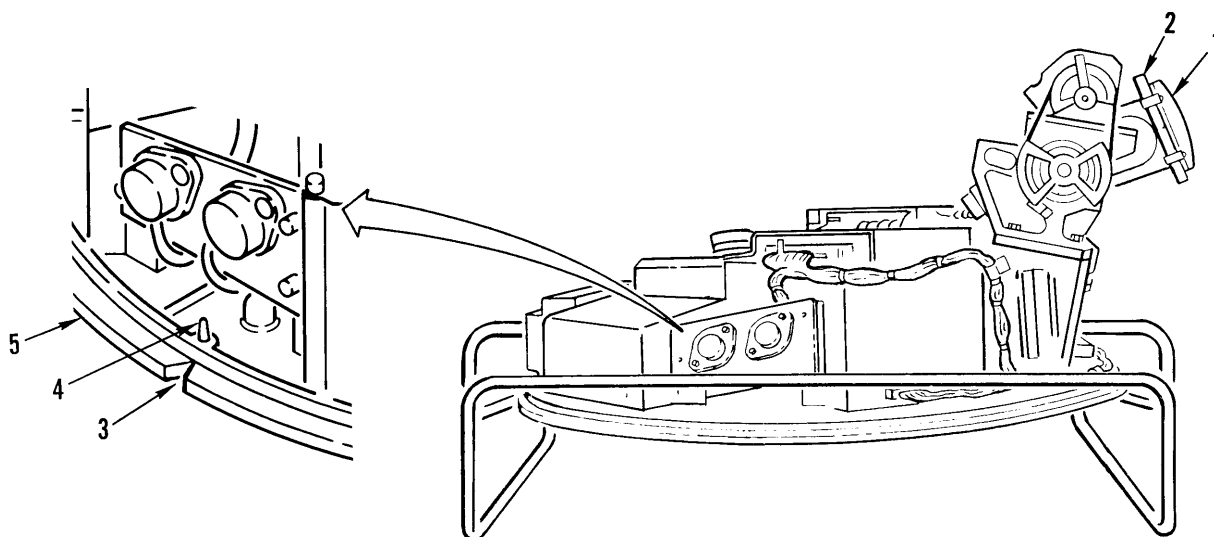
Mounting PNVS NSA on PNVS Turret Holding Fixture
